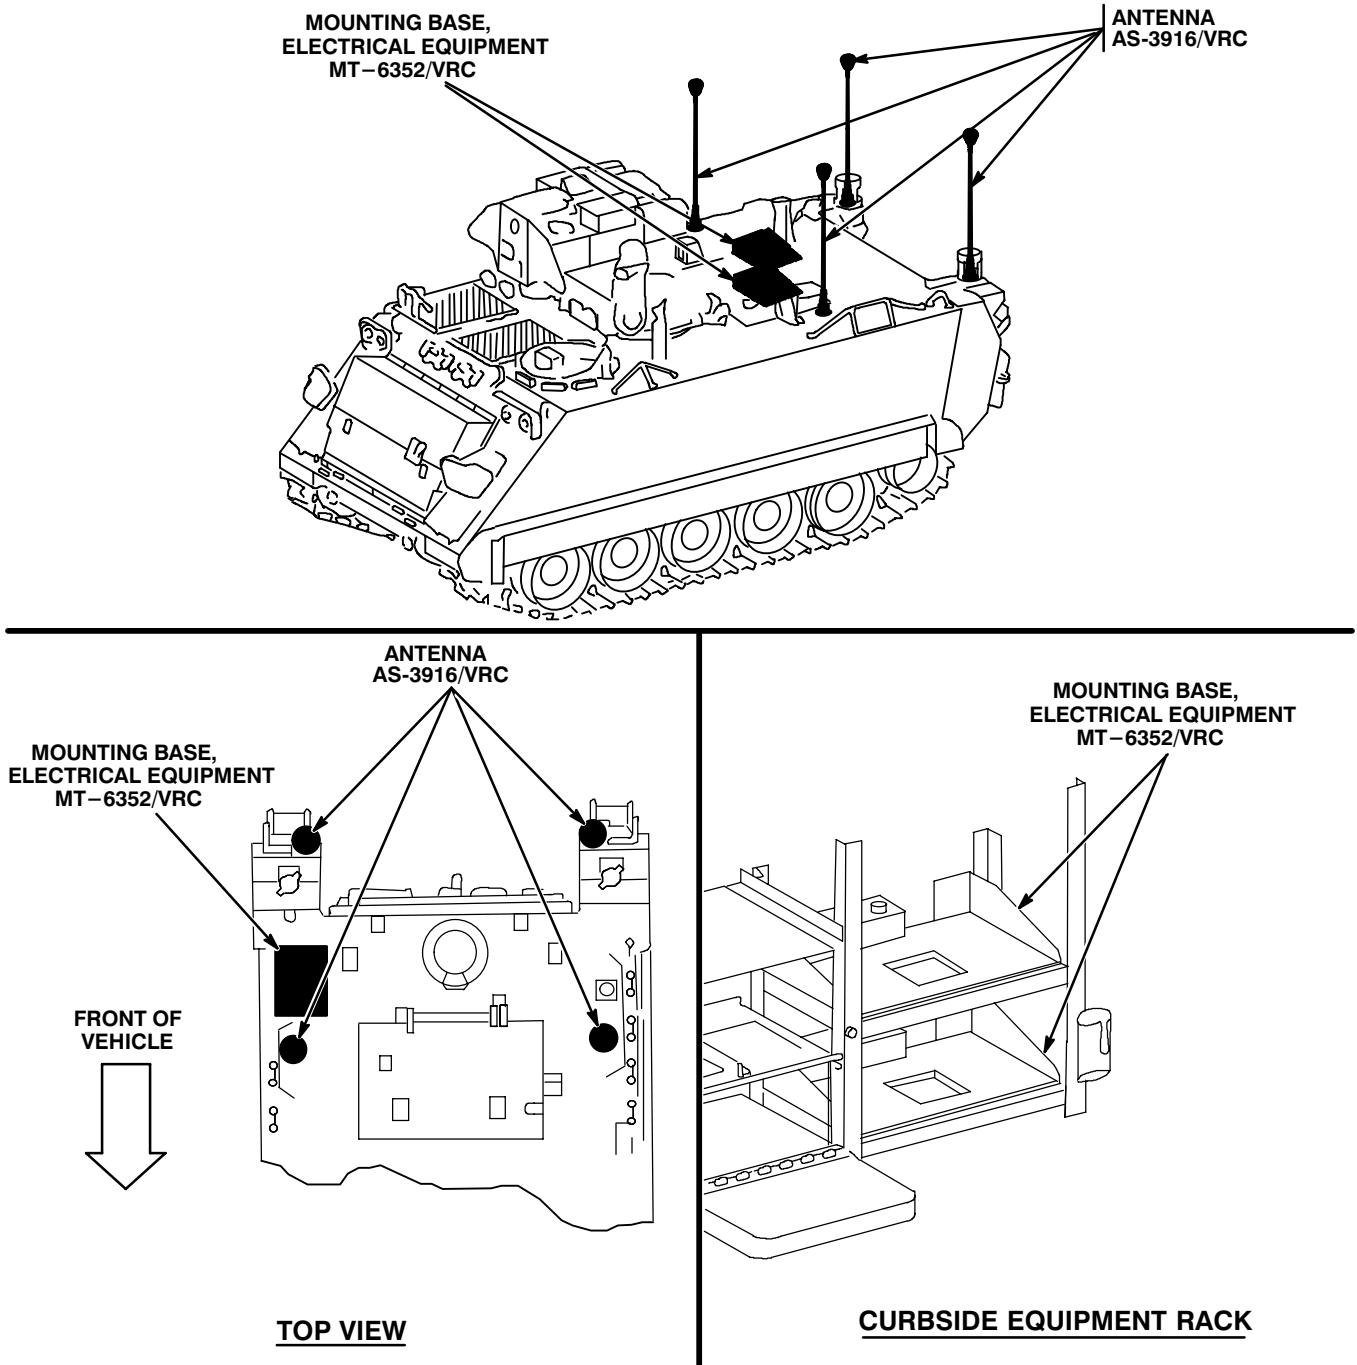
(1). MK and Radio Installation: MK Equipment Locations
